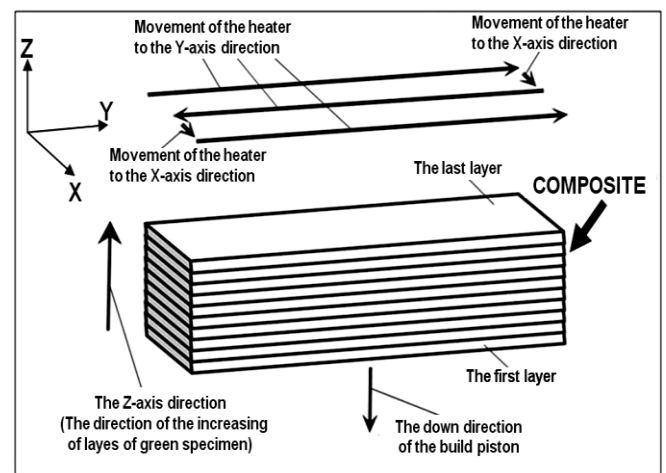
Schematic of manufacturing of green specimen using Selective Heater Melting (SHM) machine. The heater move in the X-axis direction and Y-axis direction, while the build piston move in the Z-axis direction
